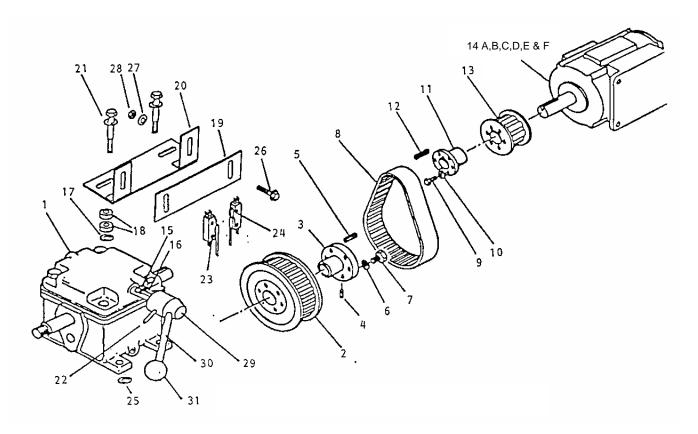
MOTOR AND POWER TRAIN ASSEMBLY
